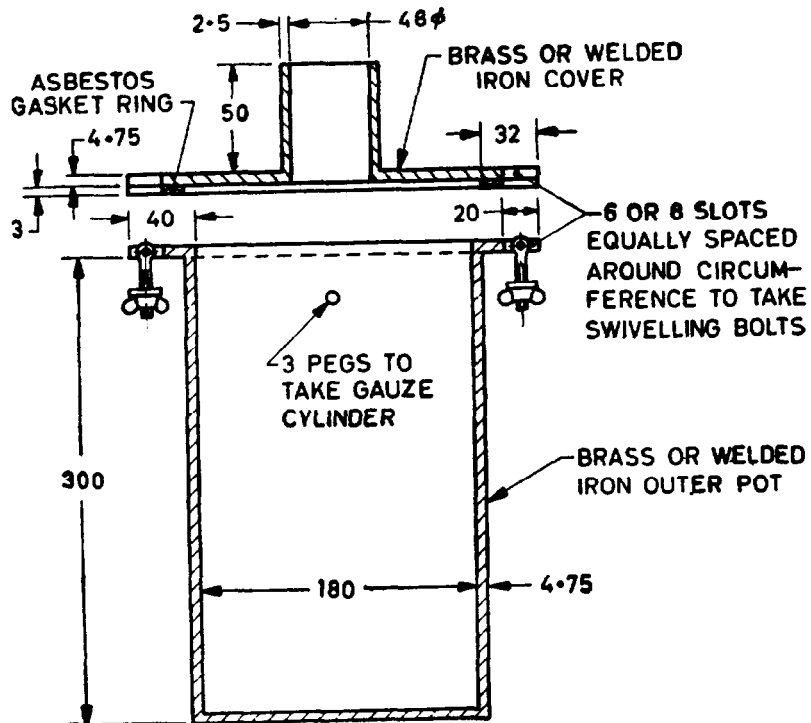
TYPICAL HARD-SOLDERED BRASS OR WELDED IRON POT
